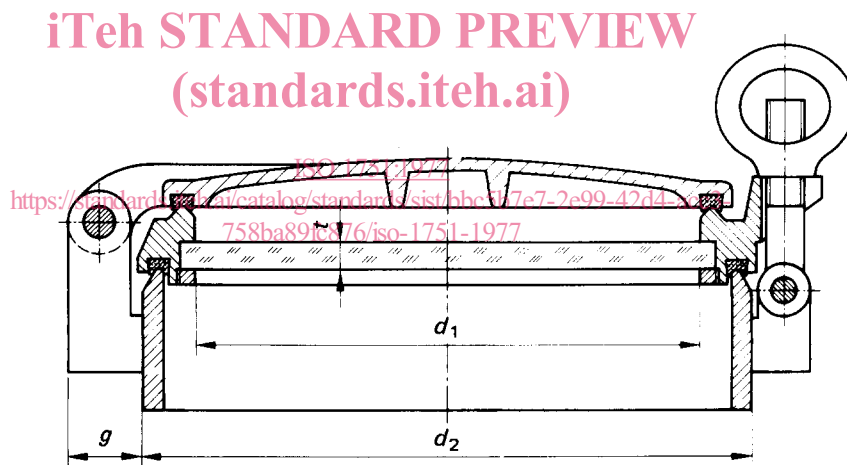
Opening side scuttle with deadlight, welded
